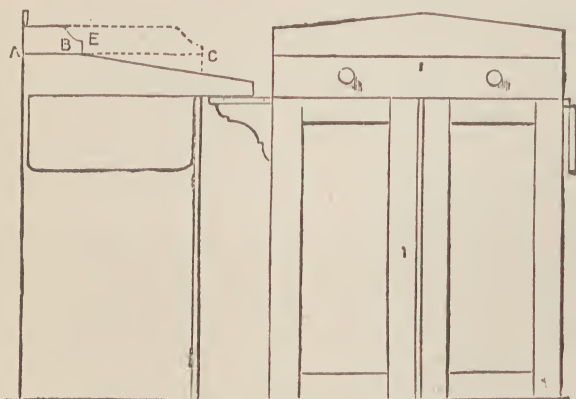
SIDE ELEVATION. FIG. 453. FRONT ELEVATION.
